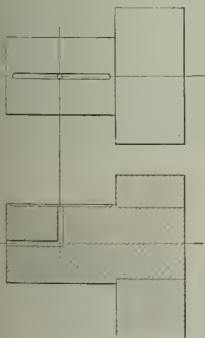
Internally-rolled Crankpin, showing Oil Passages and Grooves.
